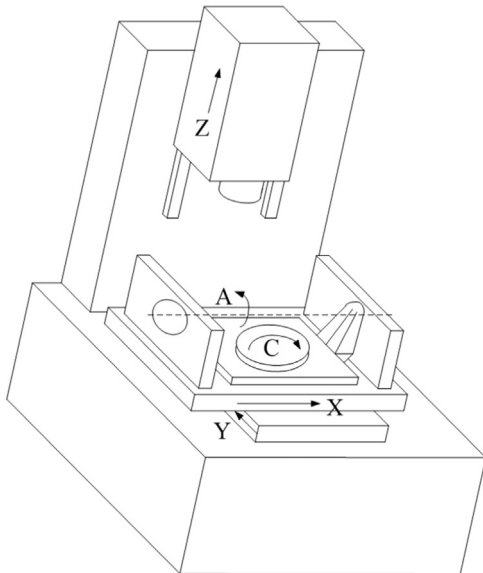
Configuration of a typical five-axis machine tool with a tilting-rotary table.
